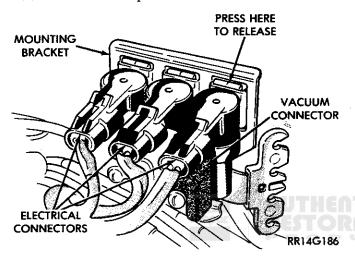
Air Switching, Canister Purge and EGR Solenoids
